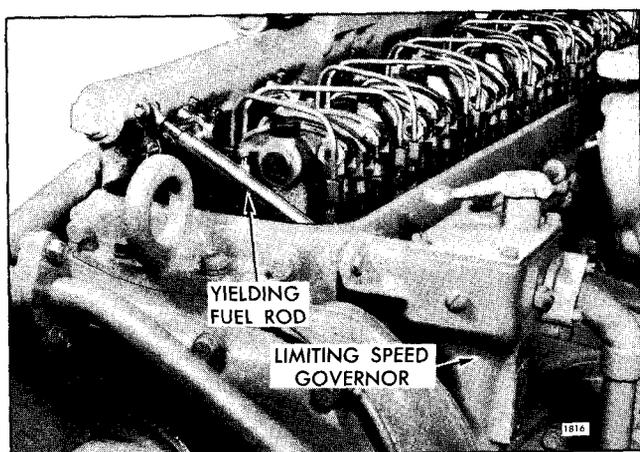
Yielding Fuel Rod Used with Limiting Speed Governor
